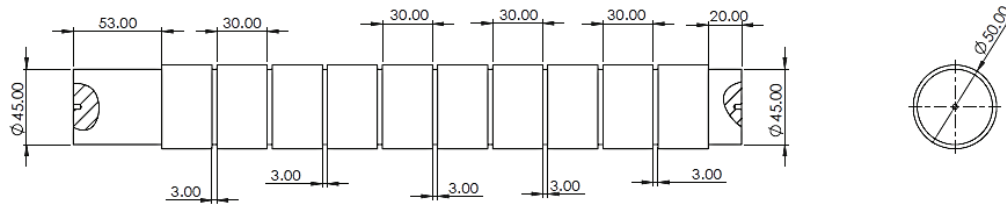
Configuration of Burnishing Workpiece: A Detailed Representation of the Workpiece Design and Dimensions.
